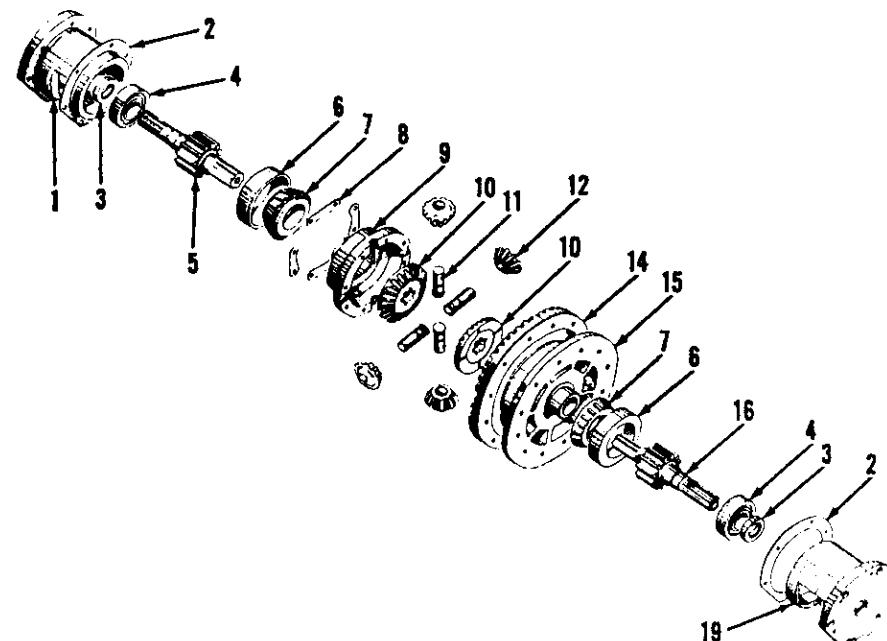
Exploded view of differential, bull pinion shafts and associated parts. Shims (2) control carrier bearing preload and gear backlash adjustments.
